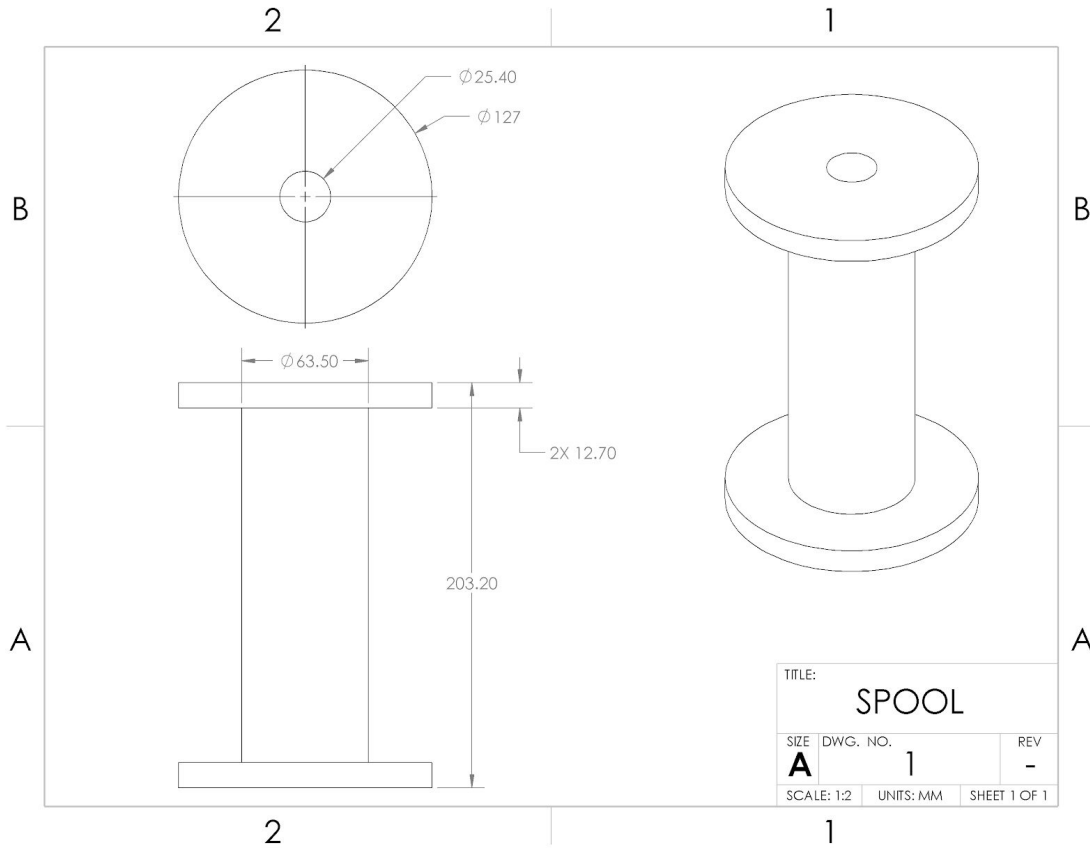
Engineering drawing a spool used to store 100 feet of rope
